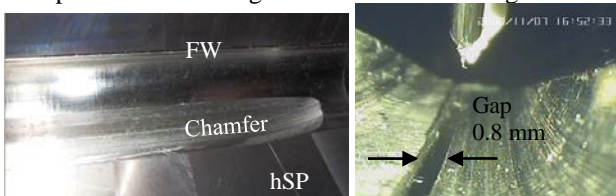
examples of chamfer before welding (a) without gap and (b) with gap
